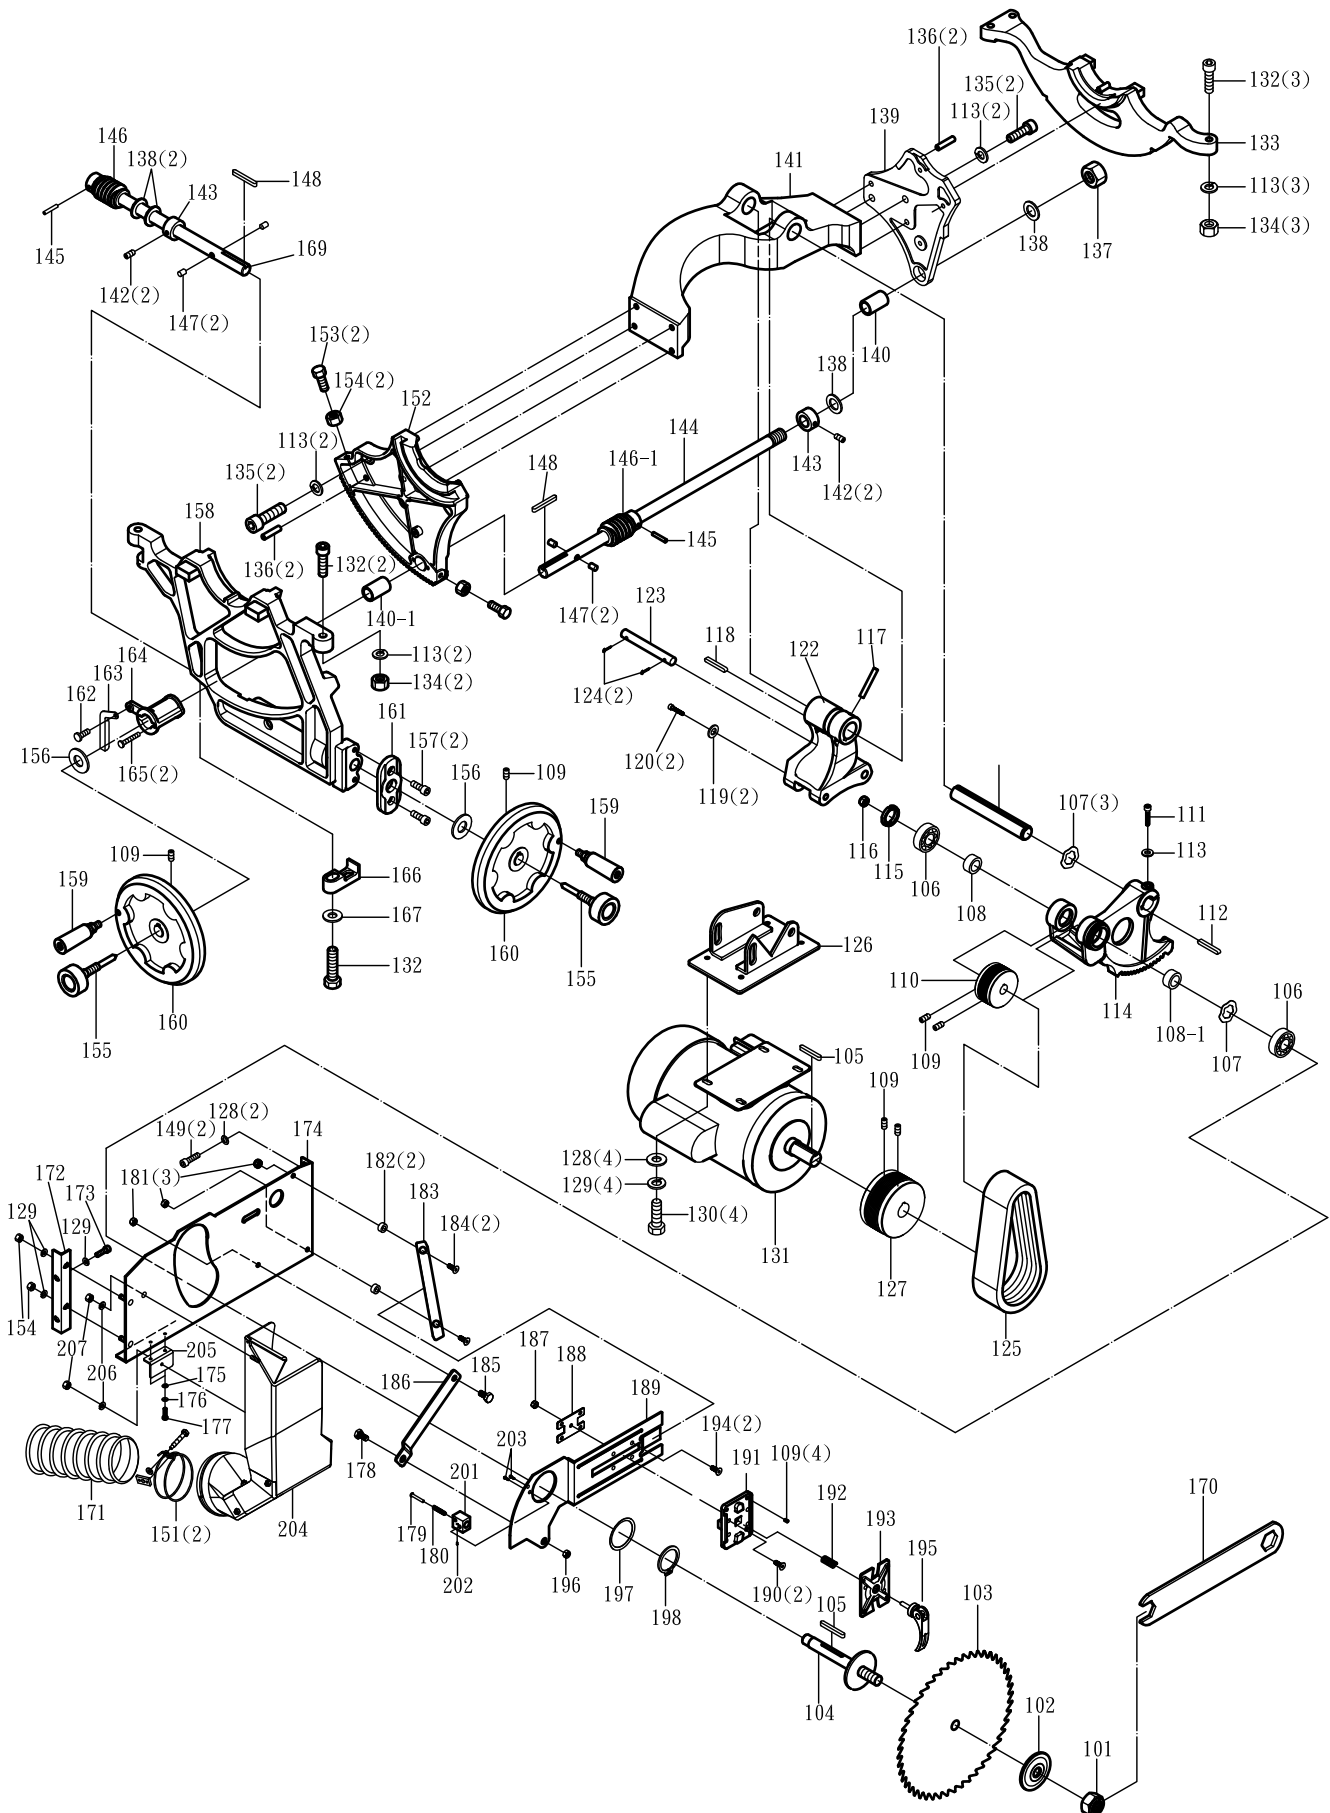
Replacement Parts Illustration for Motor Trunnion Assembly
